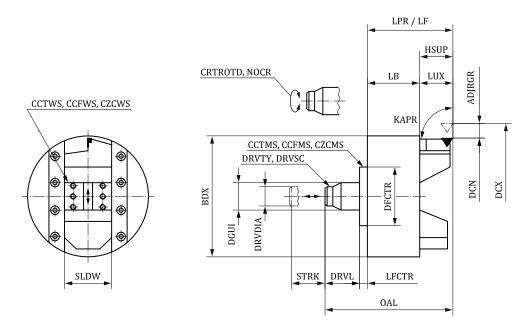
Determination of properties for feed out tools with one linear slide for internal machining
